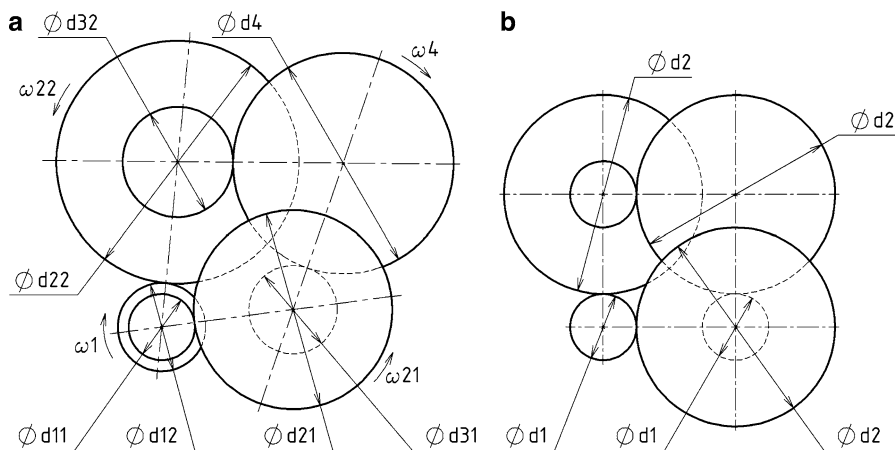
Mounting conditions (a) general case, (b) prototype design
